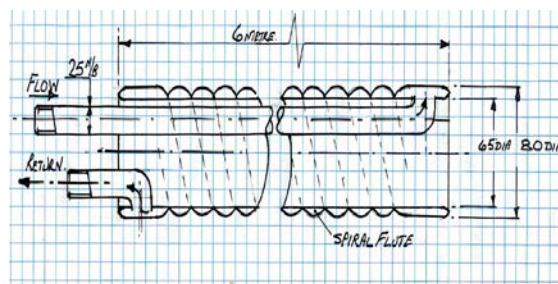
Dimension details of the spiral flute co-axial tube heat exchanger.
